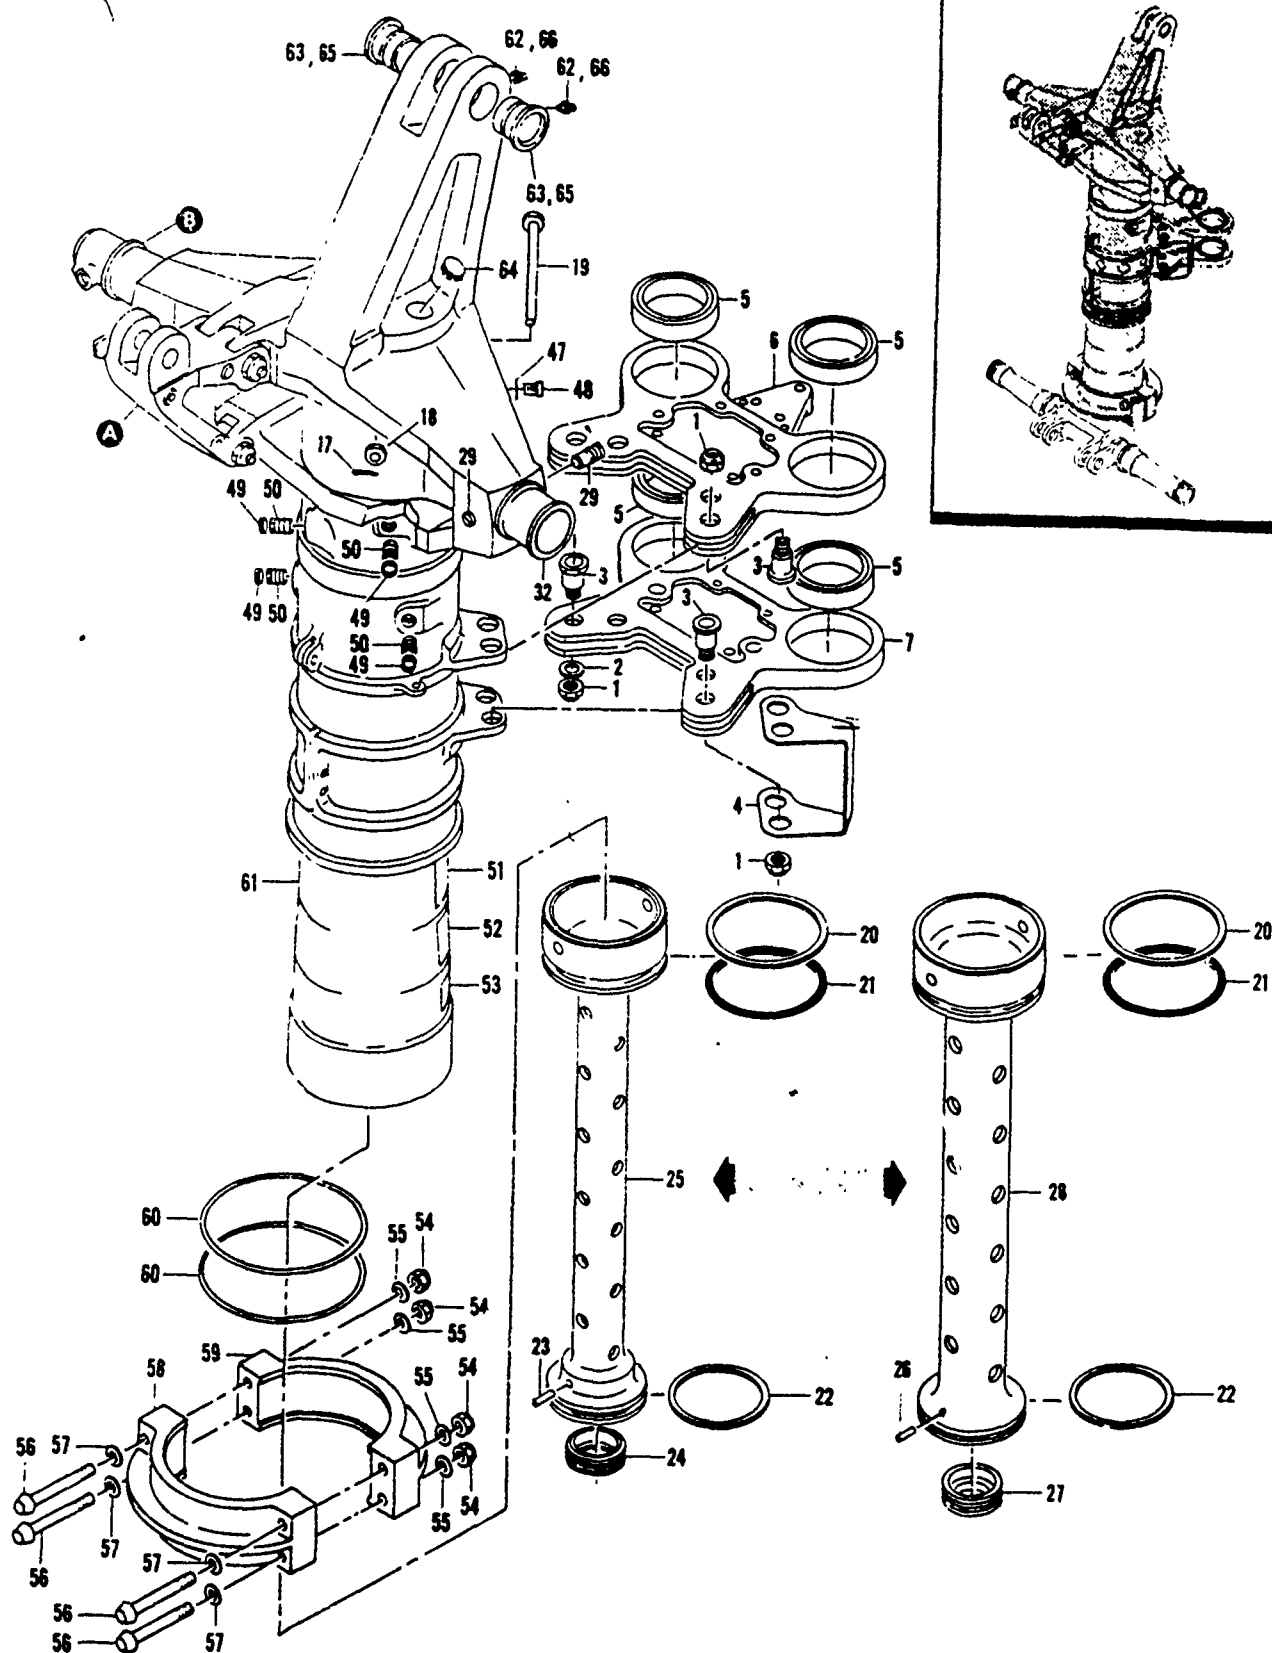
Nose Gear Outer Cylinder Assembly (Sheet 1 of 2)
